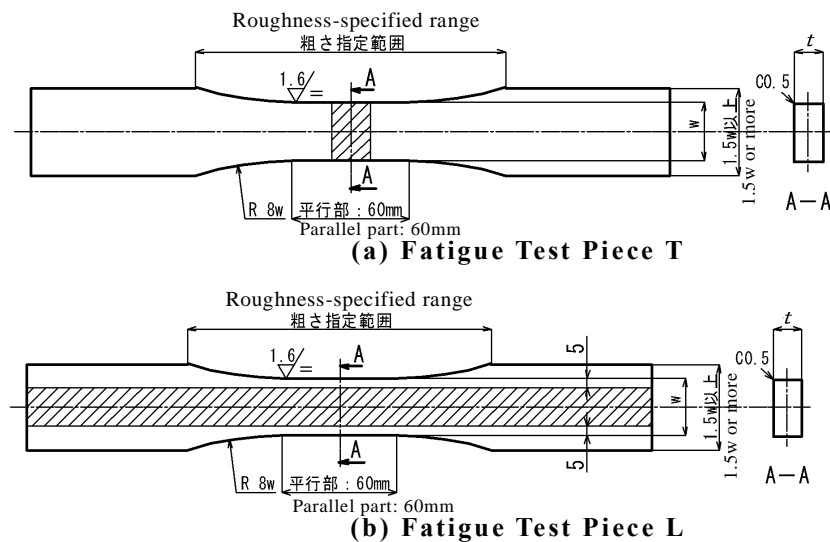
Shape and Dimensions of Fatigue Test Pieces
